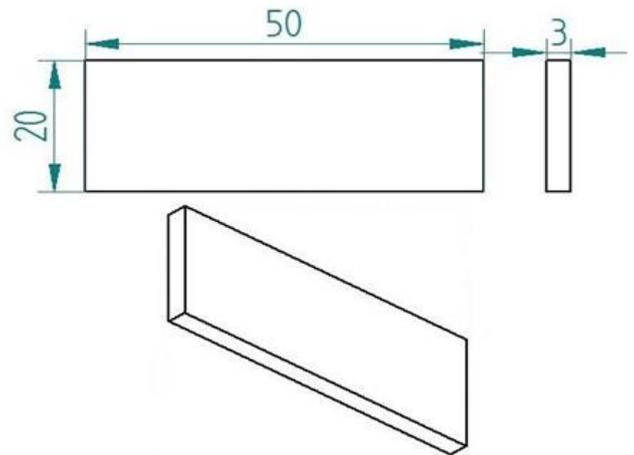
Geometry and Dimension of composite specimen for Machinability Test
